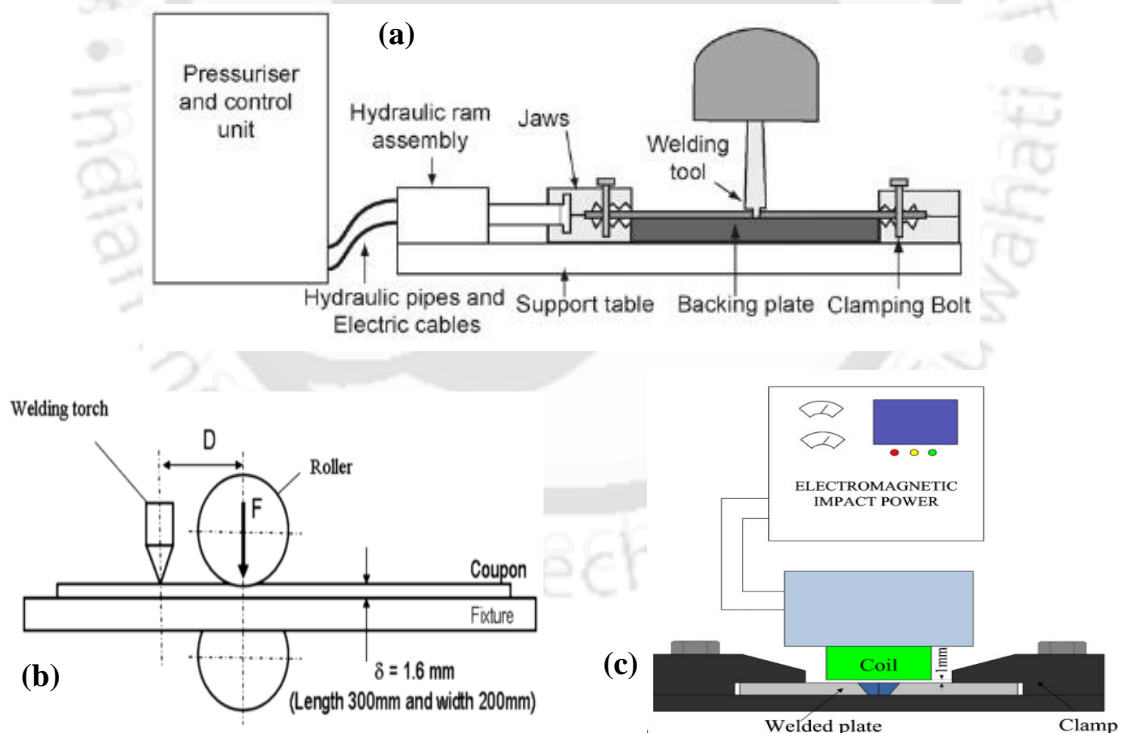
Schematic of (a) Mechanical tensioning technique [101] (b) Rolling technique [102] (c) Electromagnetic force tensioning technique [103]
